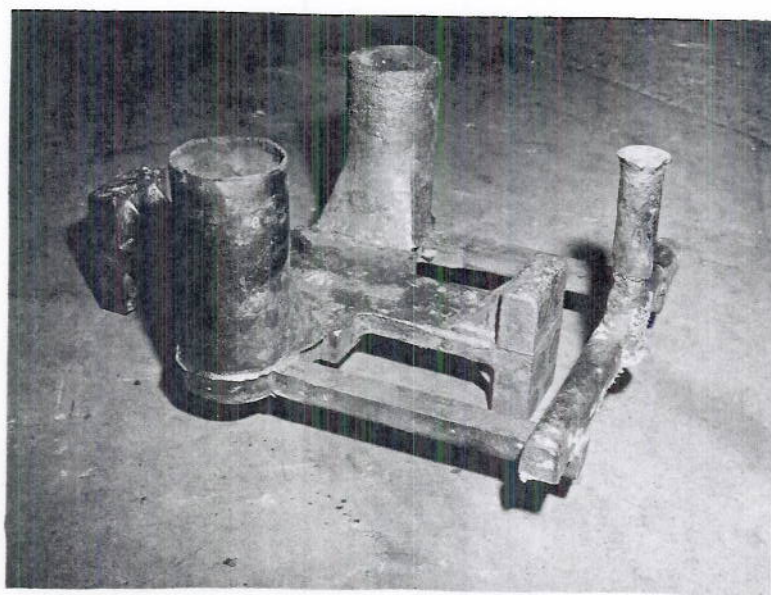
CASTING OF FIG. 18 RISERED SO THAT
